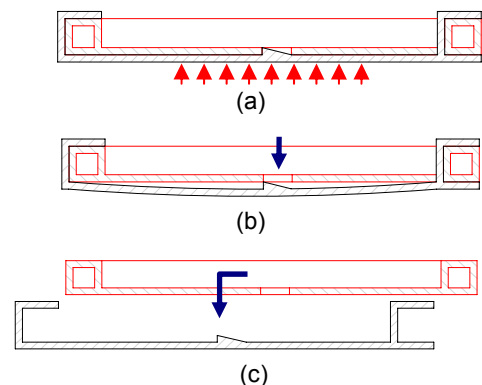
Disengagement of heat-reversible snap: (a) heat, (b) unlock, and (c) slide and remove.
